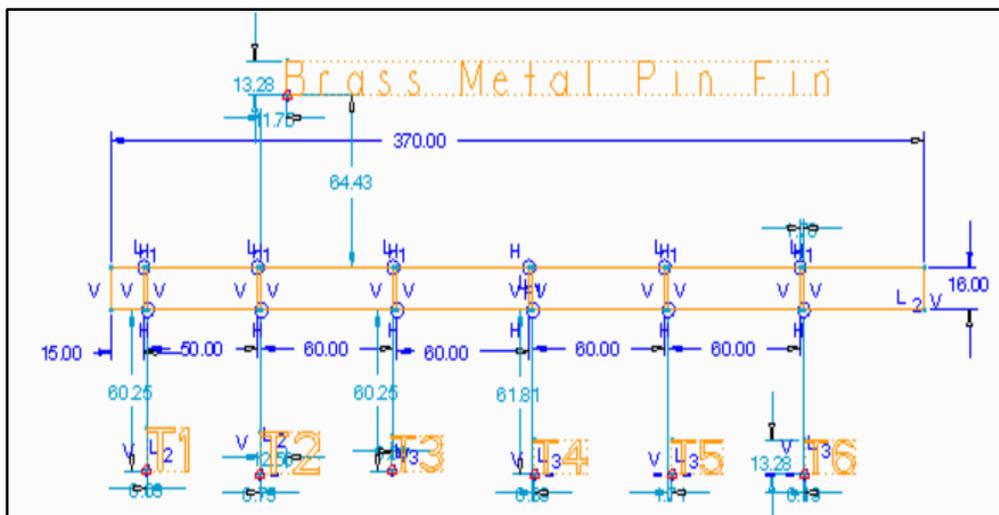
2-D Sketch of Sensor Mounted on Pin Fin (All Dimension are in mm)
